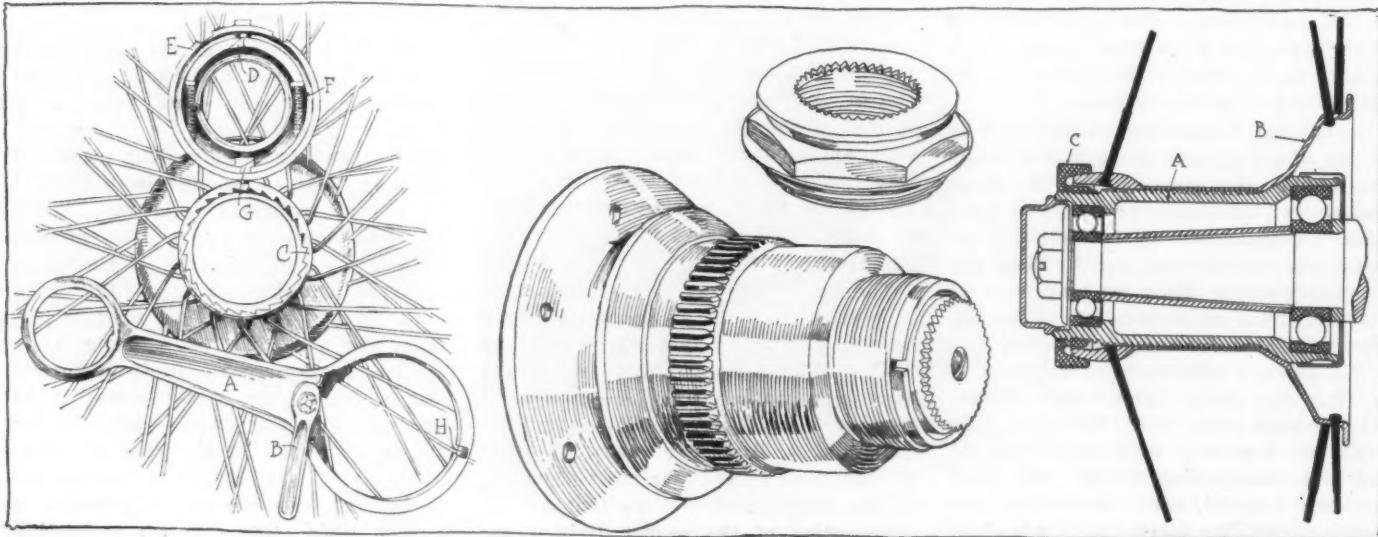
DETAILS OF THREE FOREIGN WIRE WHEELS
